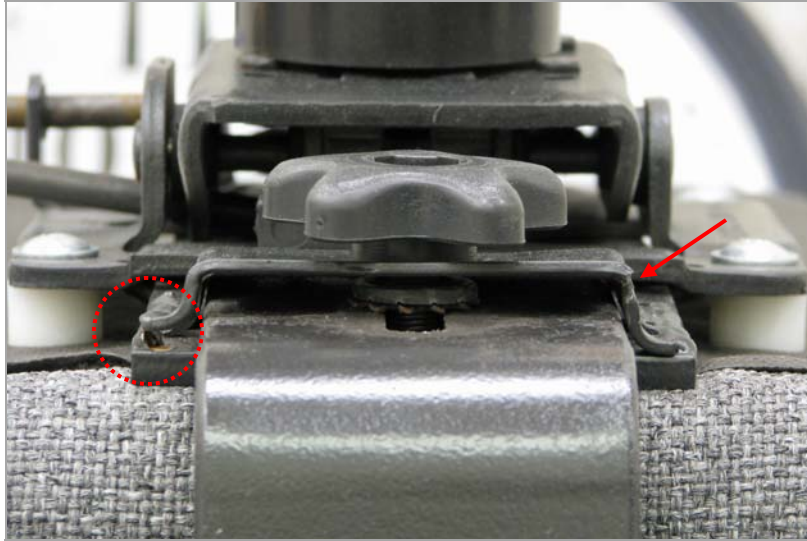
Photograph of a failed weld (circle) and a crack (arrow) in the chair back mounting bracket on an EckAdams chair observed in the Materials Failure Analysis Laboratory. Oblique view.
